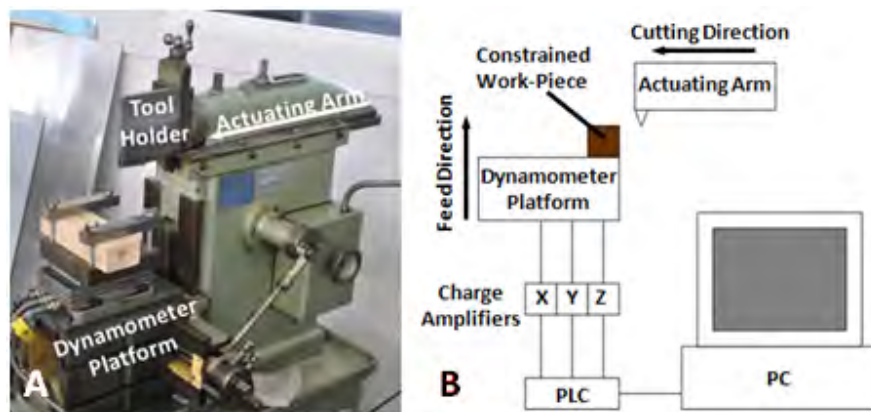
A) Shaper Machine Set-Up: B) Detailed Test-Rig Schematic
